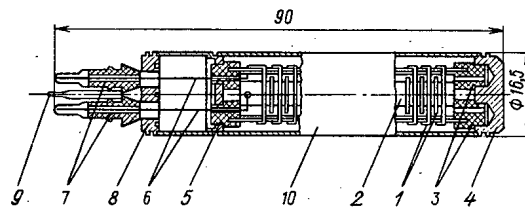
Construction of KNV-1 vacuum fission chamber: 1) 15 pairs of disks; 2) support; 3) insulators of high-alumina ceramic; 4, 5, 8) flanges; 6) current-carrying conductor; 7) cermet connection joint; 9) exhaust tube for evacuating device; 10) 16-mm tube with 0.3-mm walls.
